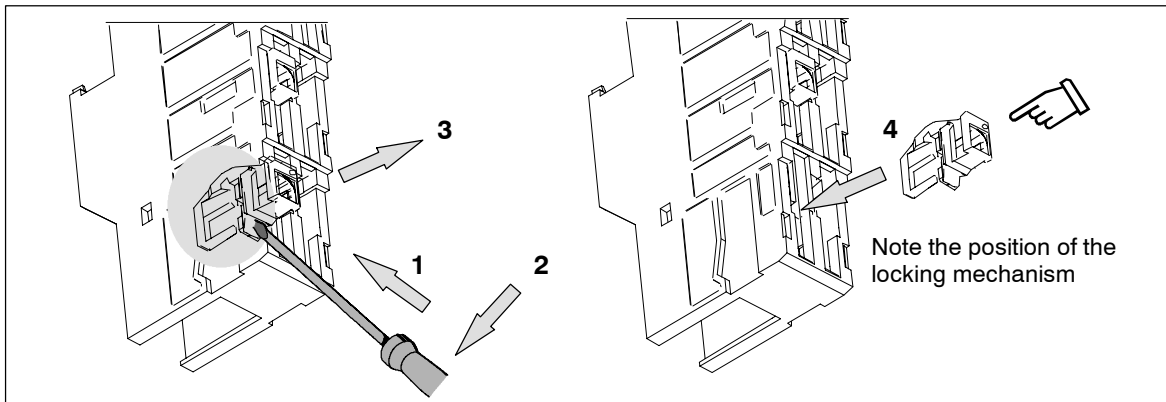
Removing the Locking Mechanism from the Terminal Module
